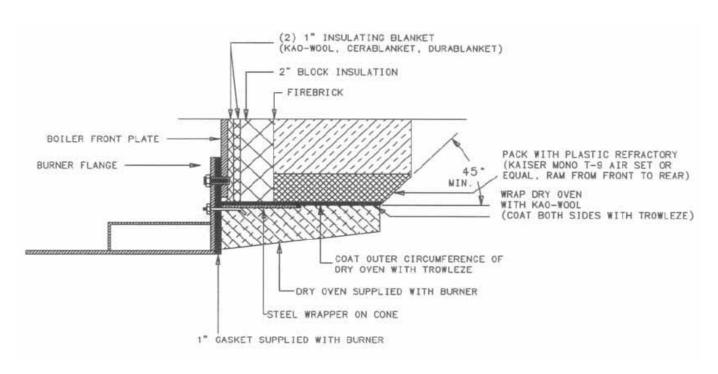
Burner Mounting Details for Firebox and Watertube Boilers
